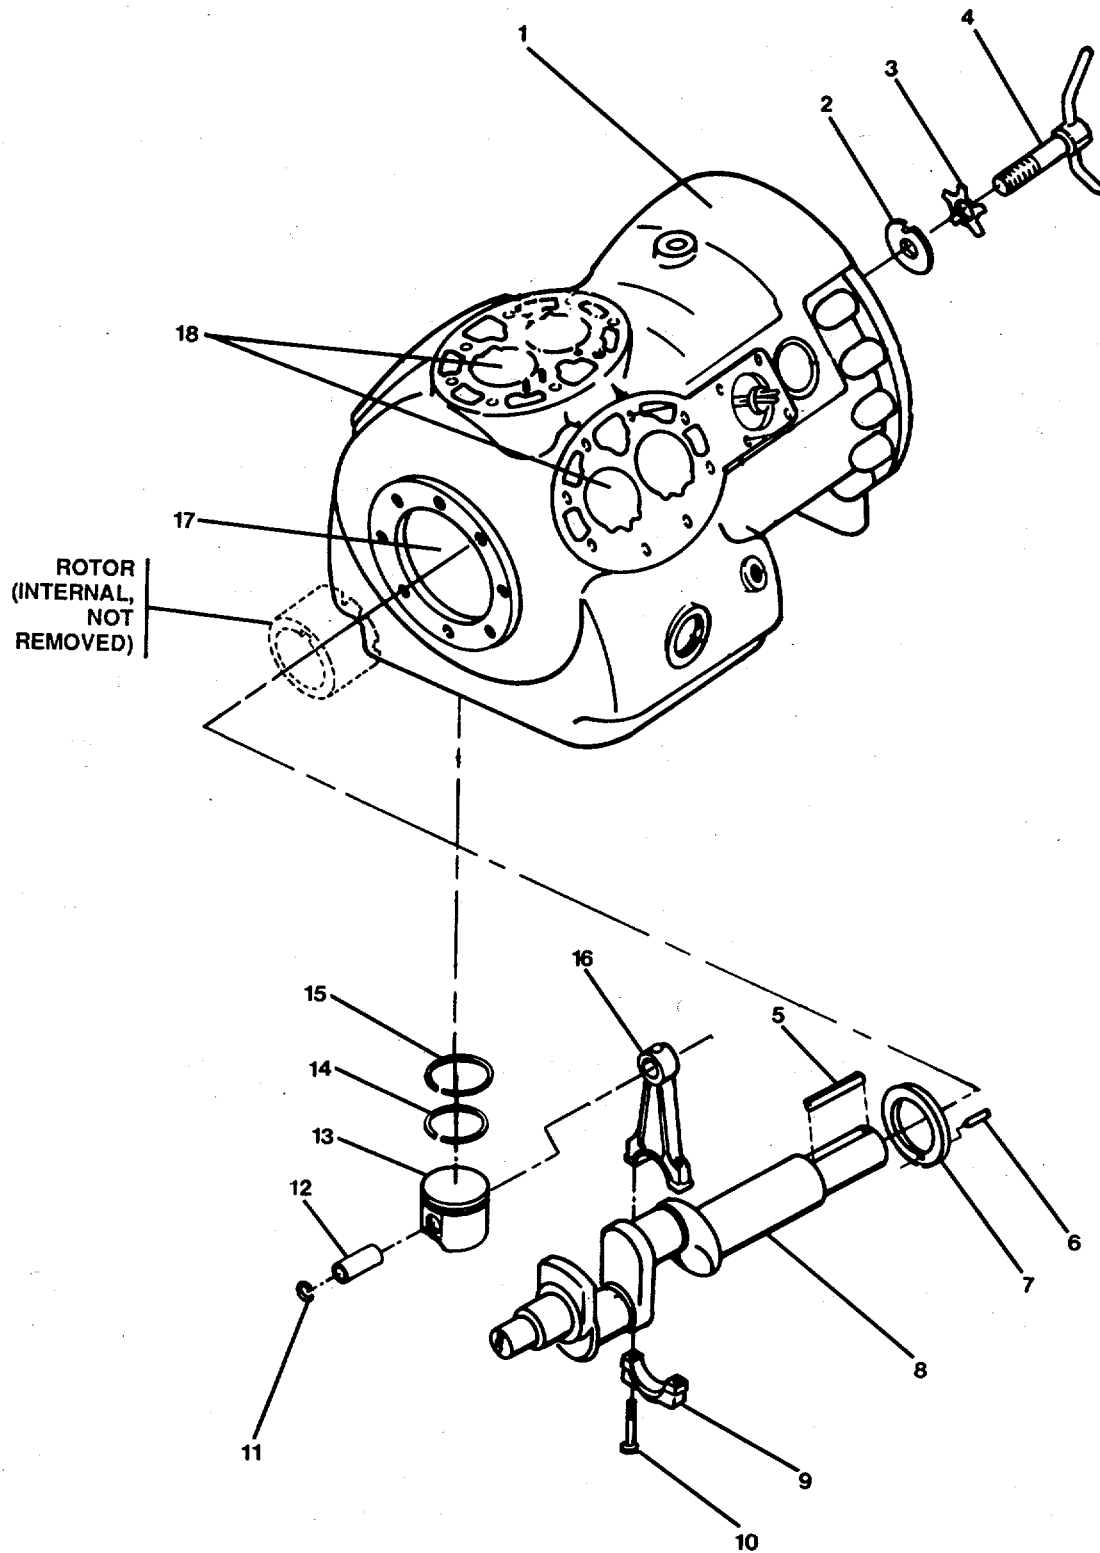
Replacing Crankshaft, Pistons, and Connecting Rods.
